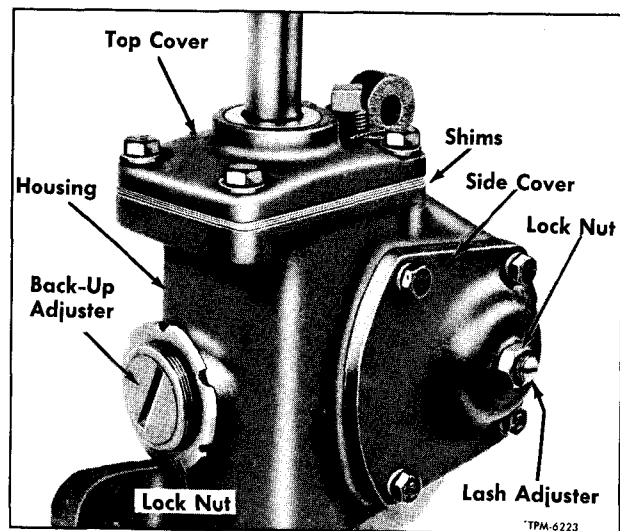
Steering Gear Adjustment Points (Type 568-D) (Typical)
